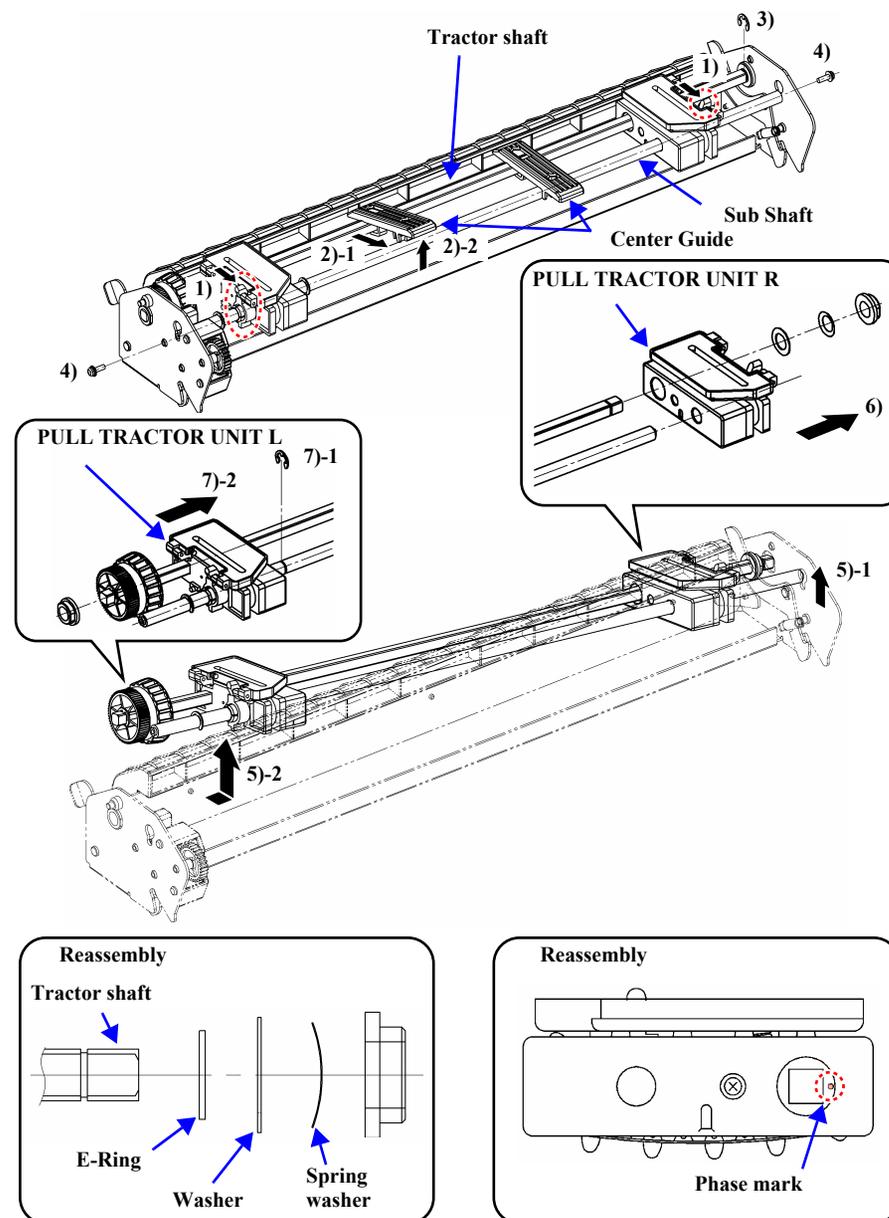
PULL TRACTOR UNIT L / PULL TRACTOR UNIT R Removal
